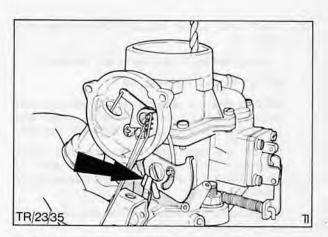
De-choke adjustment. Adjusting tag marked Carburettor viewed from the rear
